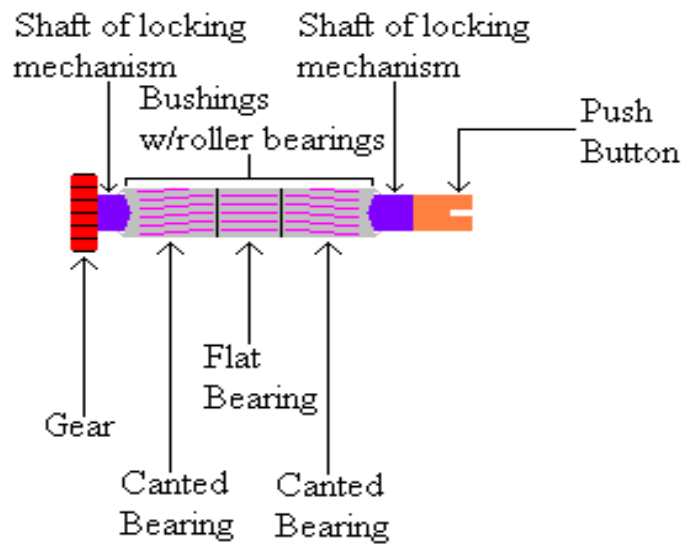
Gear mechanism and surrounding bushings with roller bearings.
